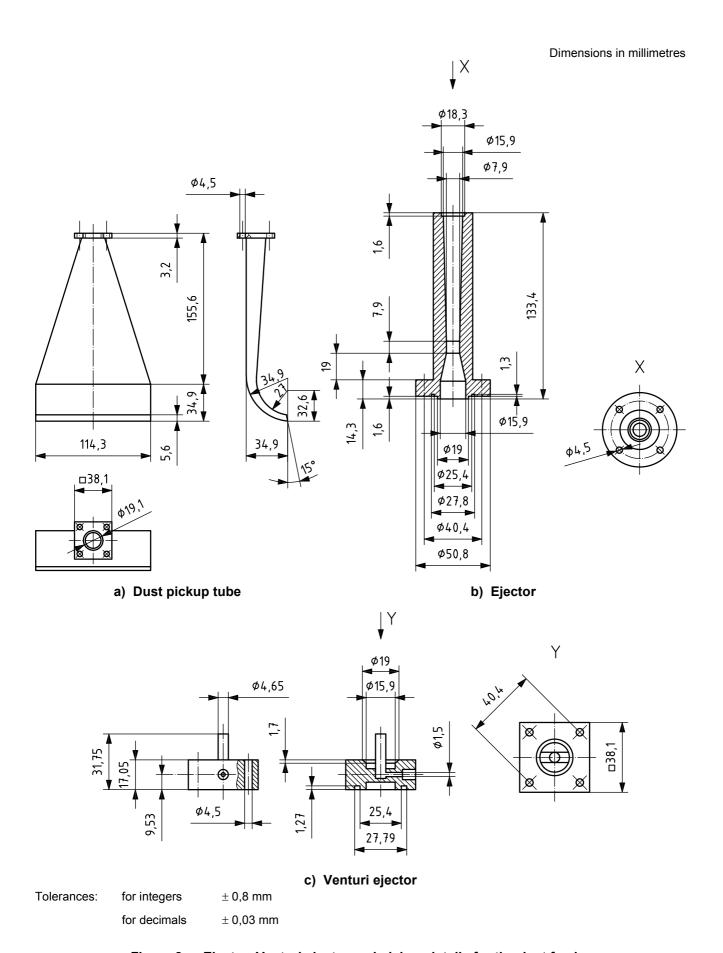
Ejector, Venturi ejector and pickup details for the dust feeder
